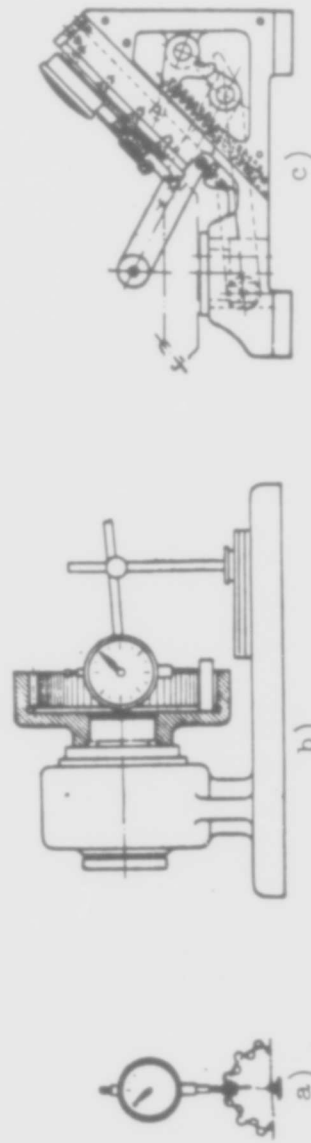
Check of run-out through tooth roots. a) external spur gears; b) internal spur gears; c) bevel gears.
